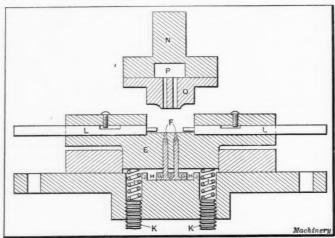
Cross-sectional View showing Construction of Punch and Die
